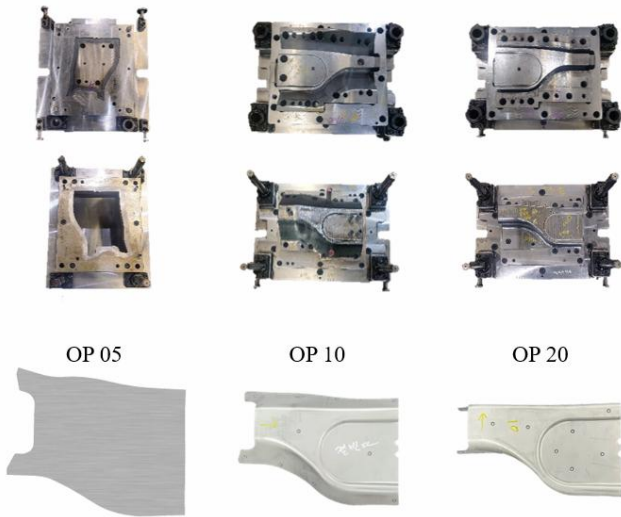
Stamping dies and deformed specimens after forming from OP05 to OP20
